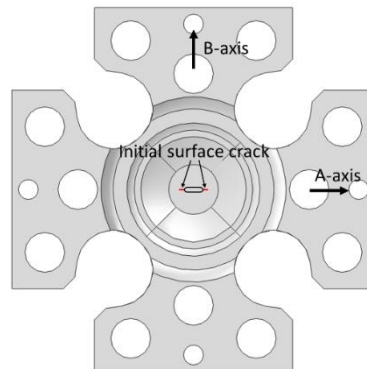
Modified biaxial specimen with notch in the centre and initial surface crack (notch and crack not in original scale).
